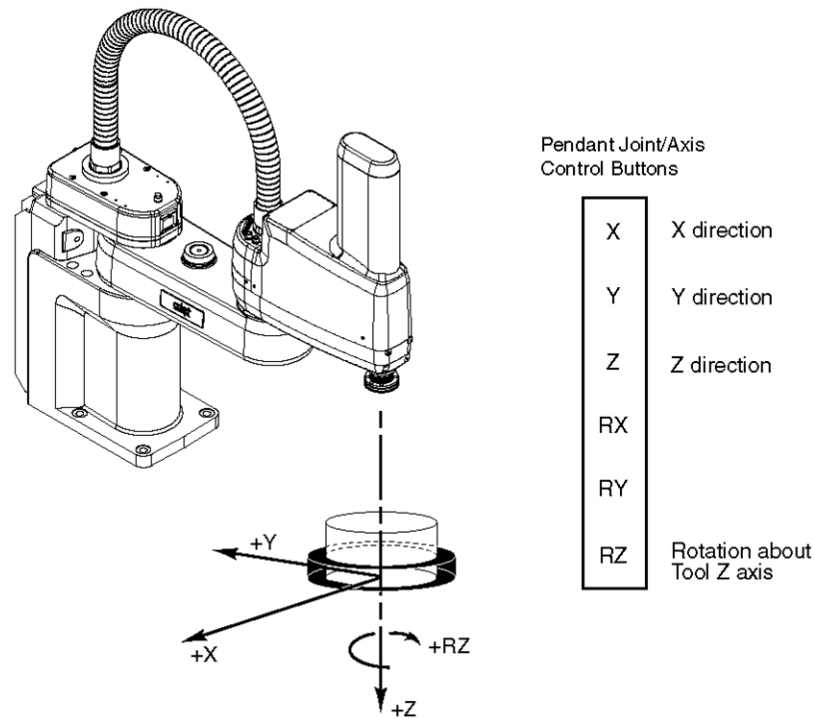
Tool Mode (Four-Axis Adept Cobra Robot Shown)
